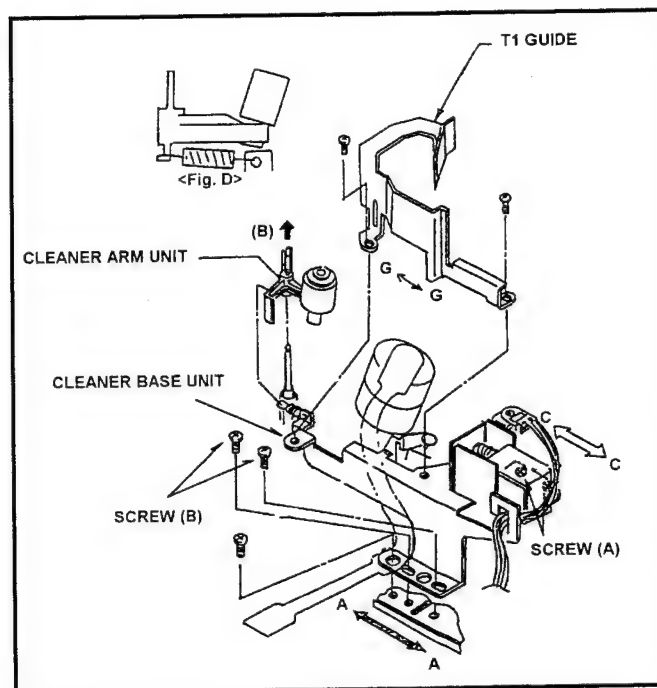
Cleaner Solenoid Position Adjustment
